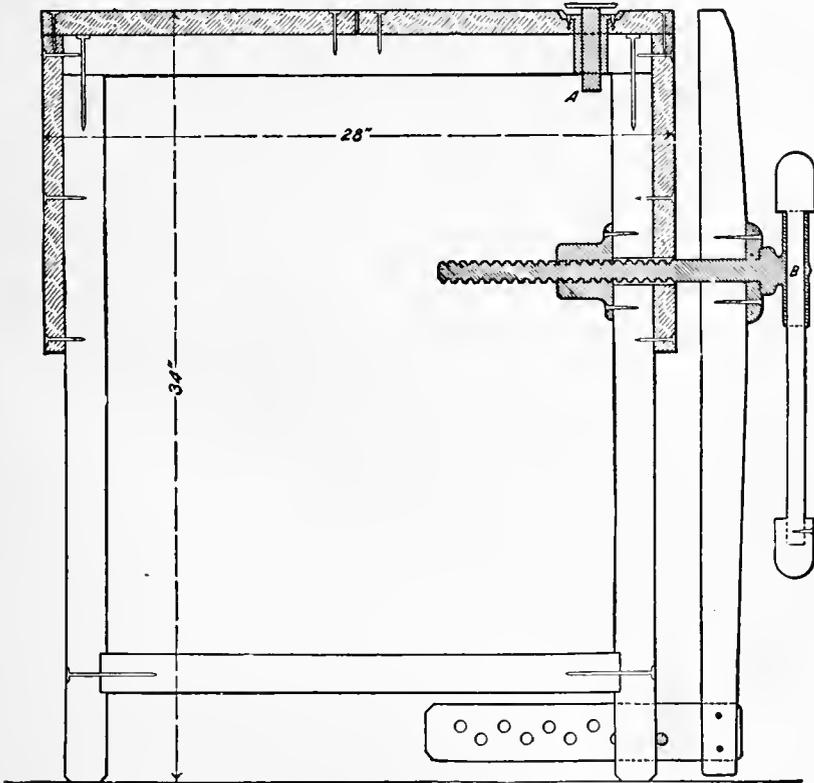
Cross section of workbench: A, planing stop; B, bench screw.
